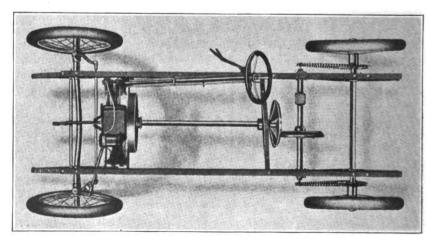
TOP VIEW OF THE METZ CAR CHASSIS
